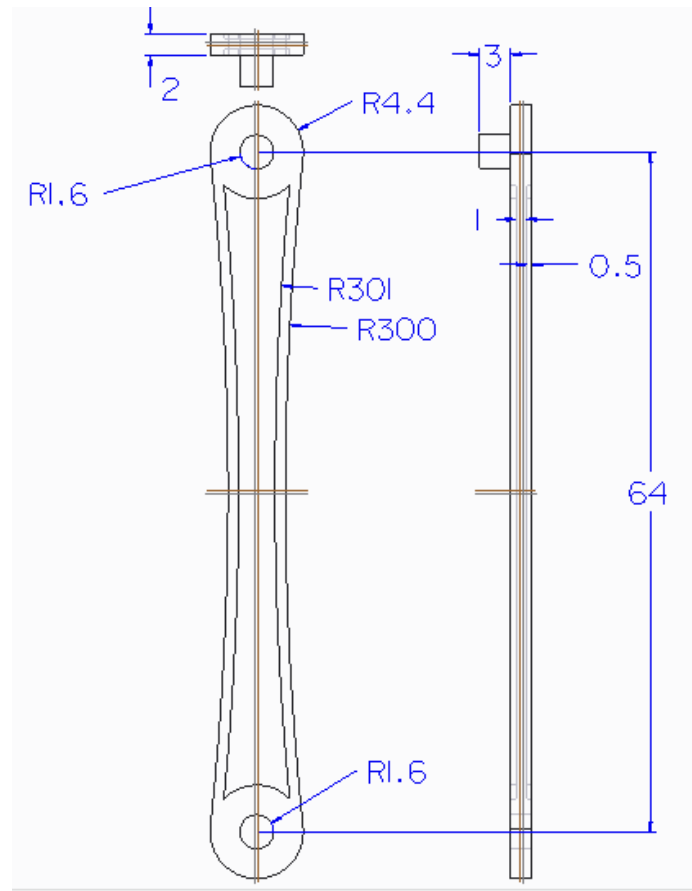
CAD Drawing of Connecting Rod of Secondary Mechanism
